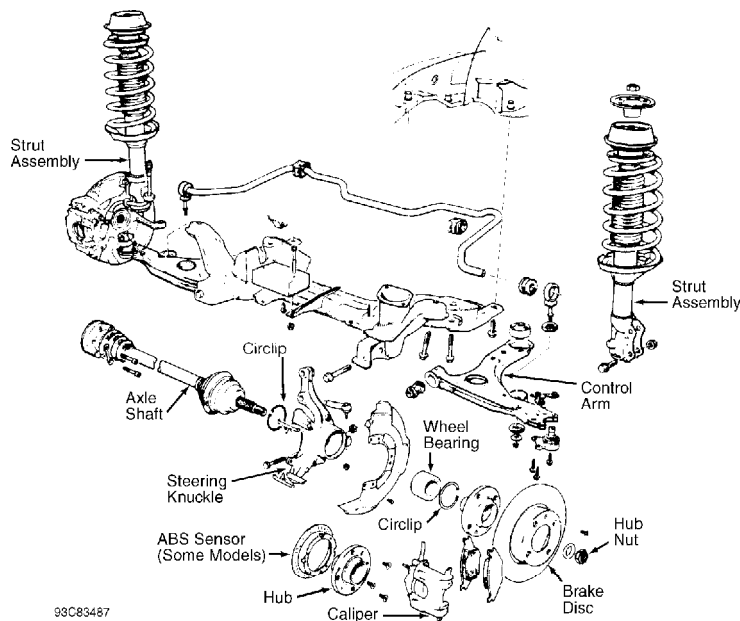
Exploded View Of Front Suspension (Jetta, Golf & GTI)
